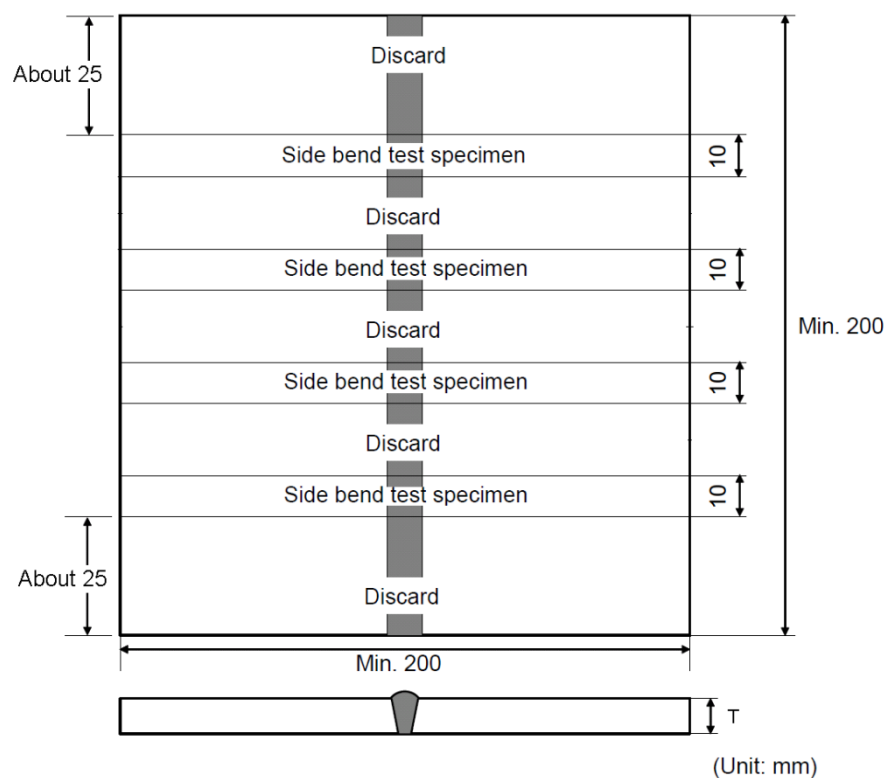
Dimensions and types of test assembly for butt welds ($T \geq 12\text{mm}$)
